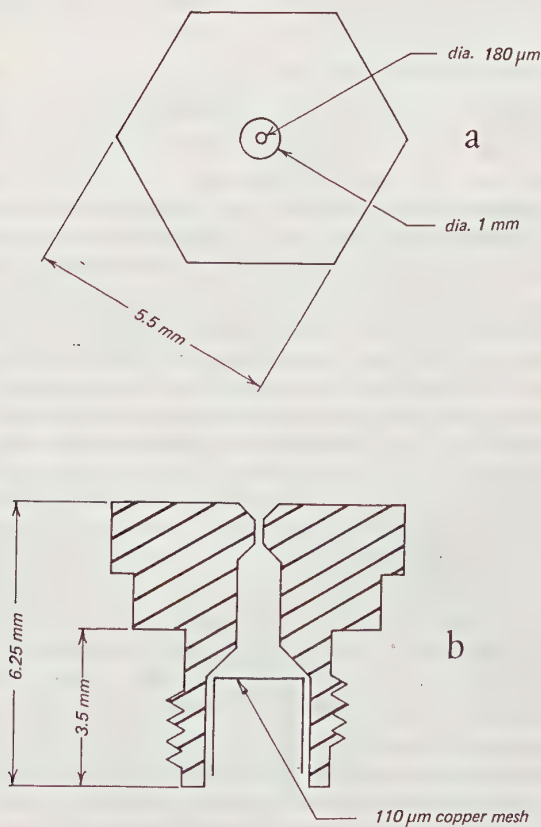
The nozzle and its dimensions: a) plan view; b) side view.
